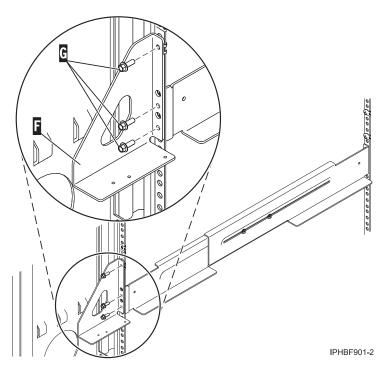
Attaching the extension brackets and rails to the back of the rack.
